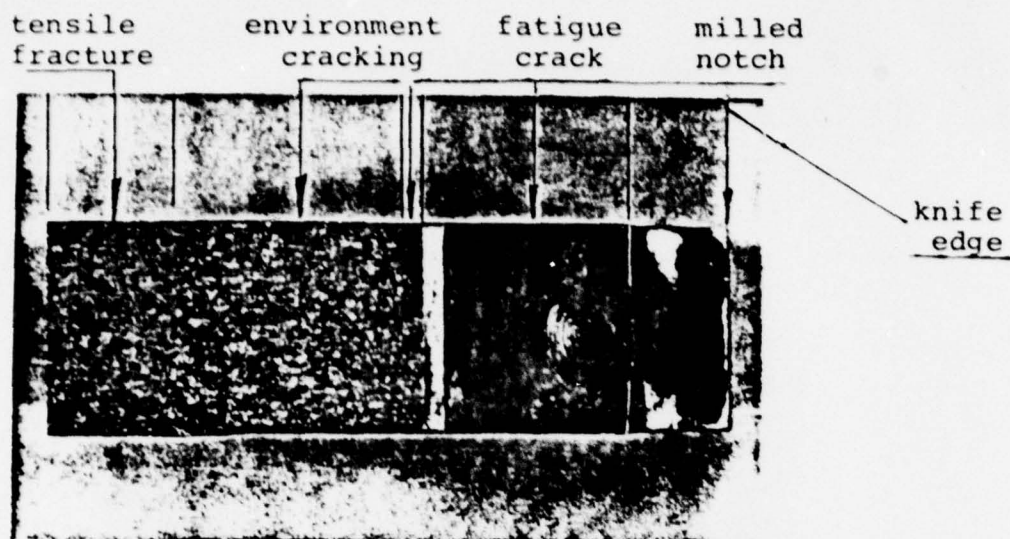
The test specimen separated after the environment test and several hours in the dessicator. The knife edge for clip gage #1, the machined notch zone #2, the fatigue crack zone #3, the sustained load environment attack zone #4, and the tensile fracture zone #5 are shown.
